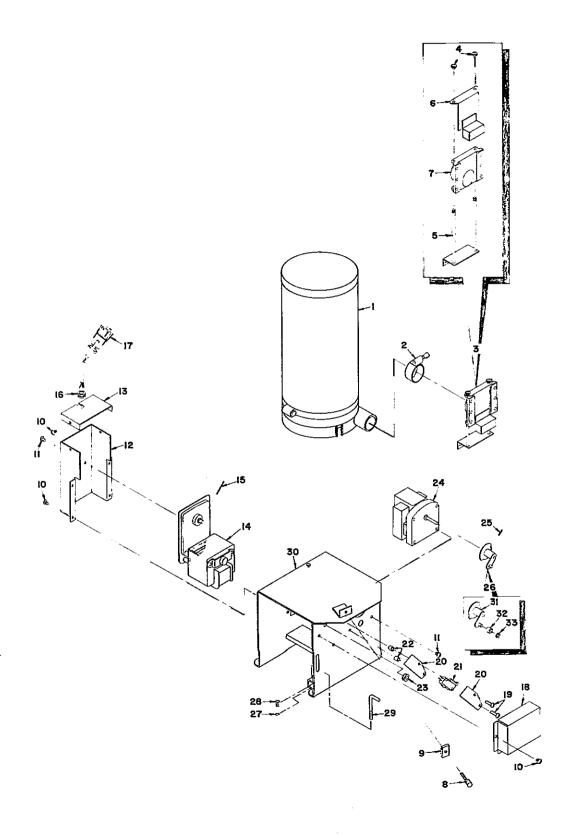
COFFEE CANISTER AND STAND ASSEMBLY
